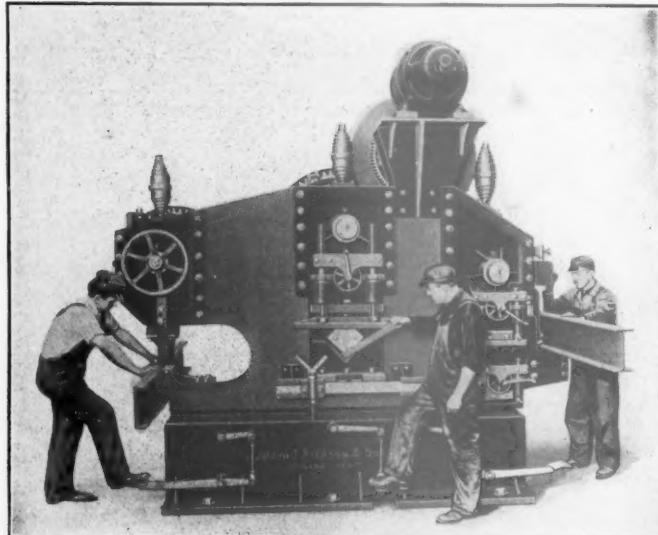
Ryerson Quintuple Punching and Shearing Machine.
